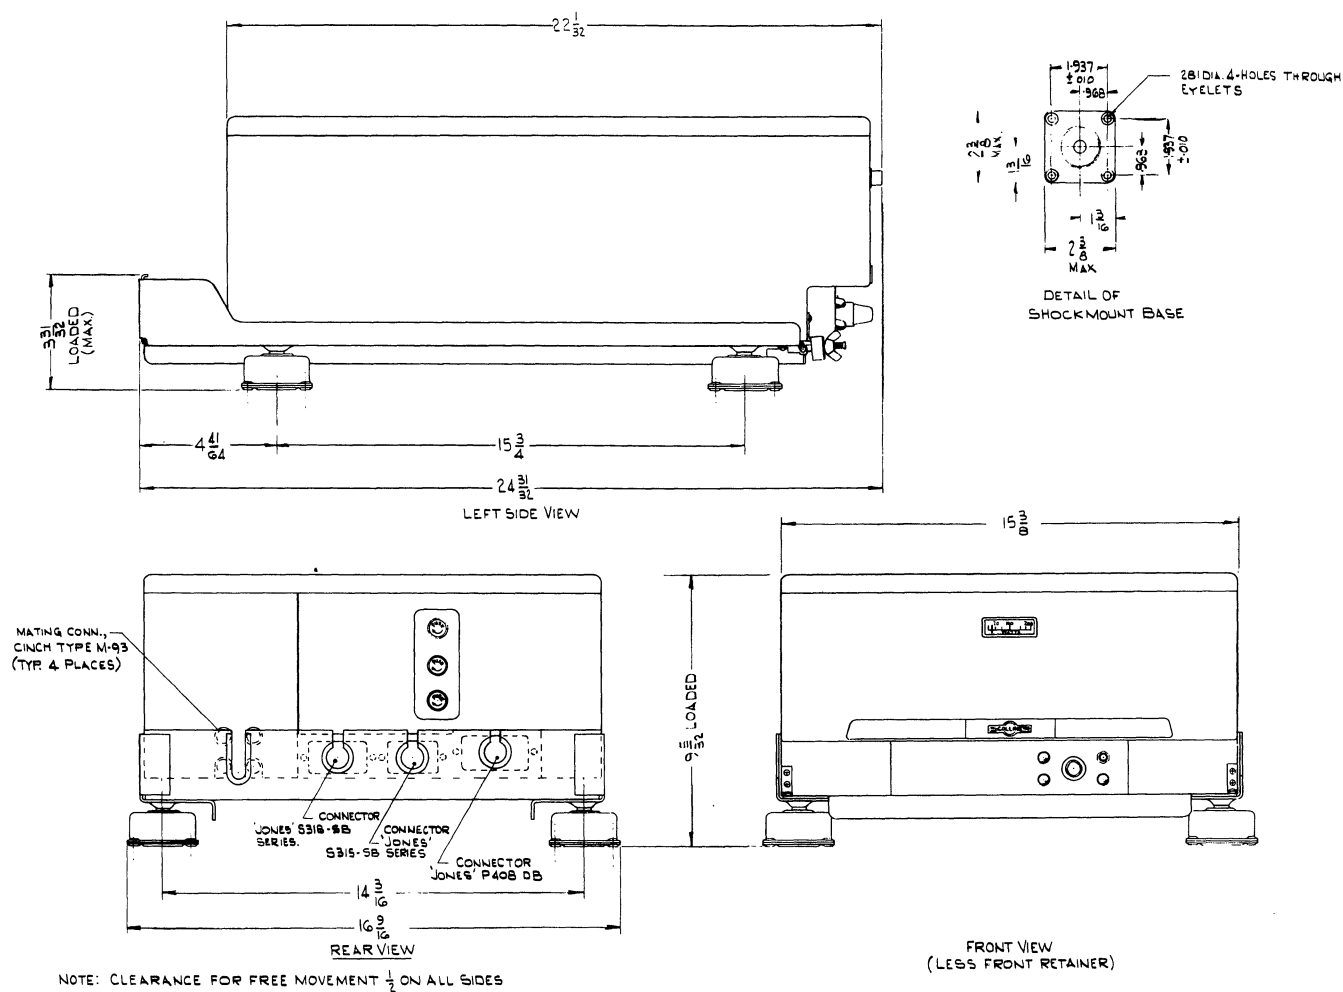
Transceiver 32MS-1A, Outline and Mounting Dimensions
